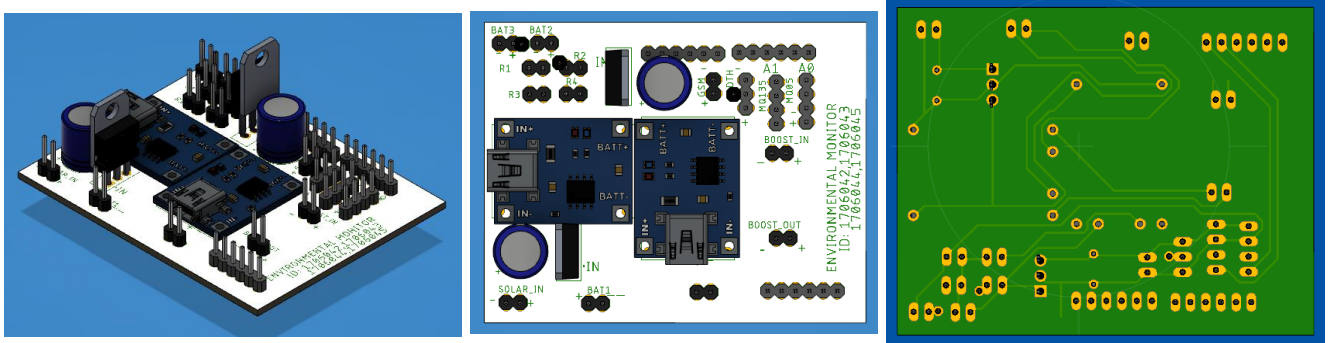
PCB 3D rendering image (left) home view, (middle) top view, (right) bottom view with windings.
